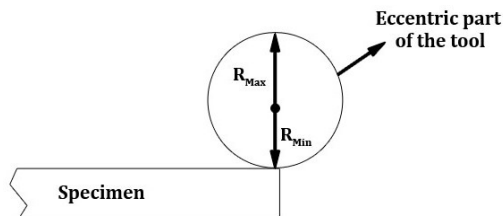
Initial position of tool and specimen to keep contact with eccentric part of the tool at each step
